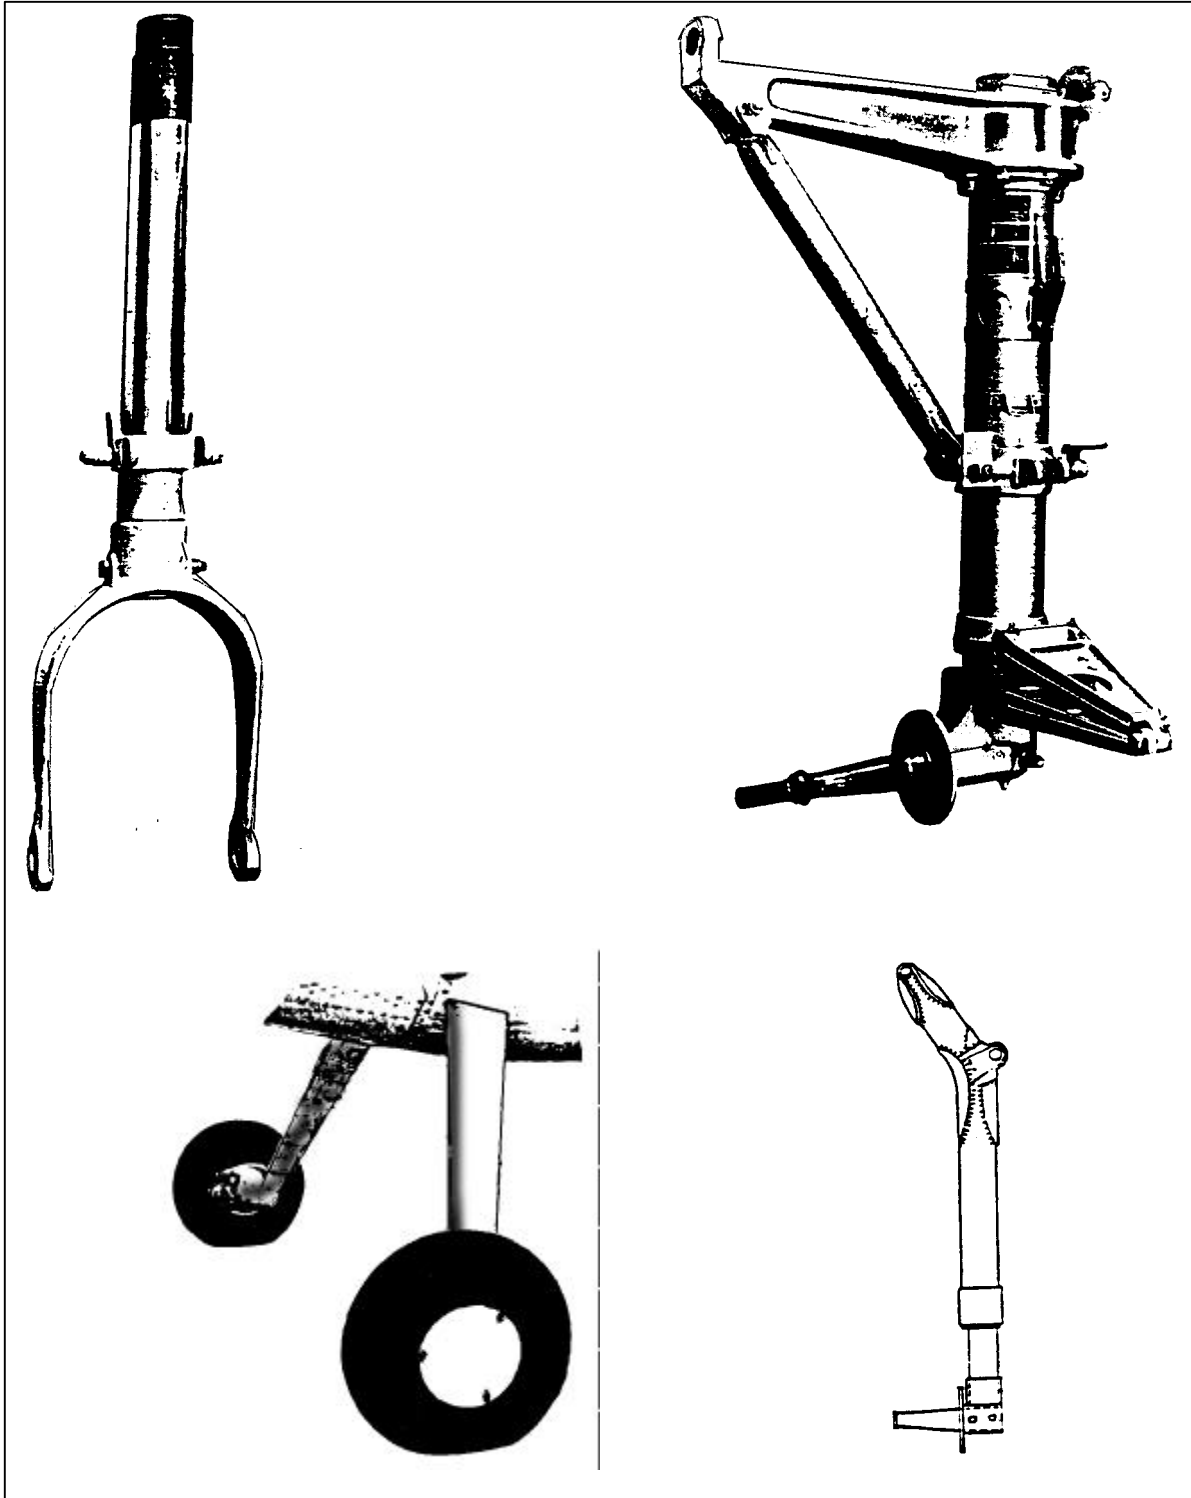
Landing gear assemblies that CANNOT be repaired by welding.
